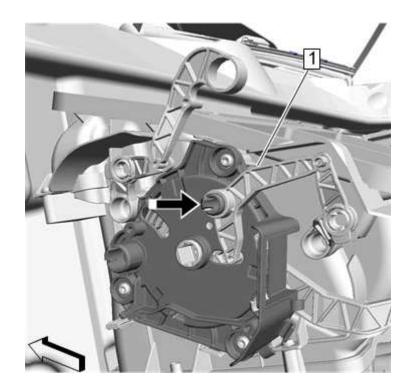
Vent Valve Lever Courtesy of GENERAL MOTORS COMPANY
